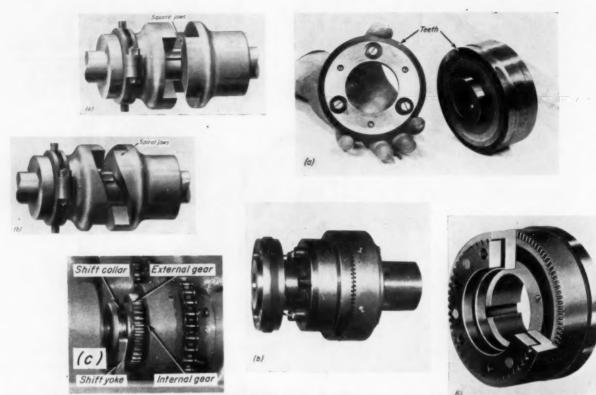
Some typical positive-contact clutches. Spiral jaw type, b, simplifies engagement but design causes members to be forced apart if drive direction forces spiral faces into contact. Good installation procedure is illustrated by the gear clutch installation, c, where shift mechanism is connected to the member which does not rotate when the clutch is disengaged.
